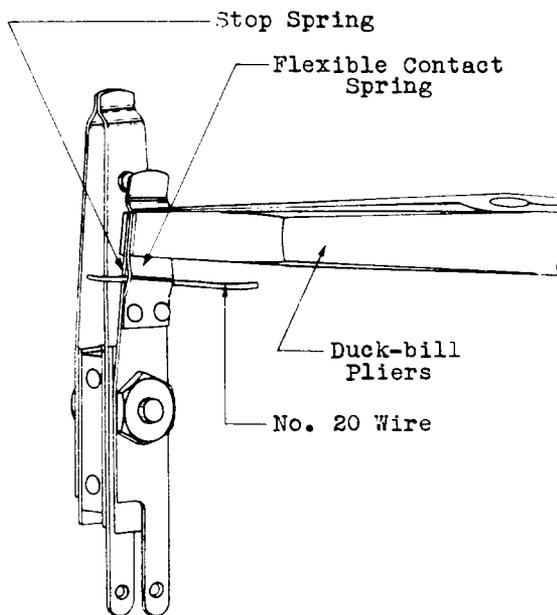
Method of Adjusting for Flexible Contact Spring Position
